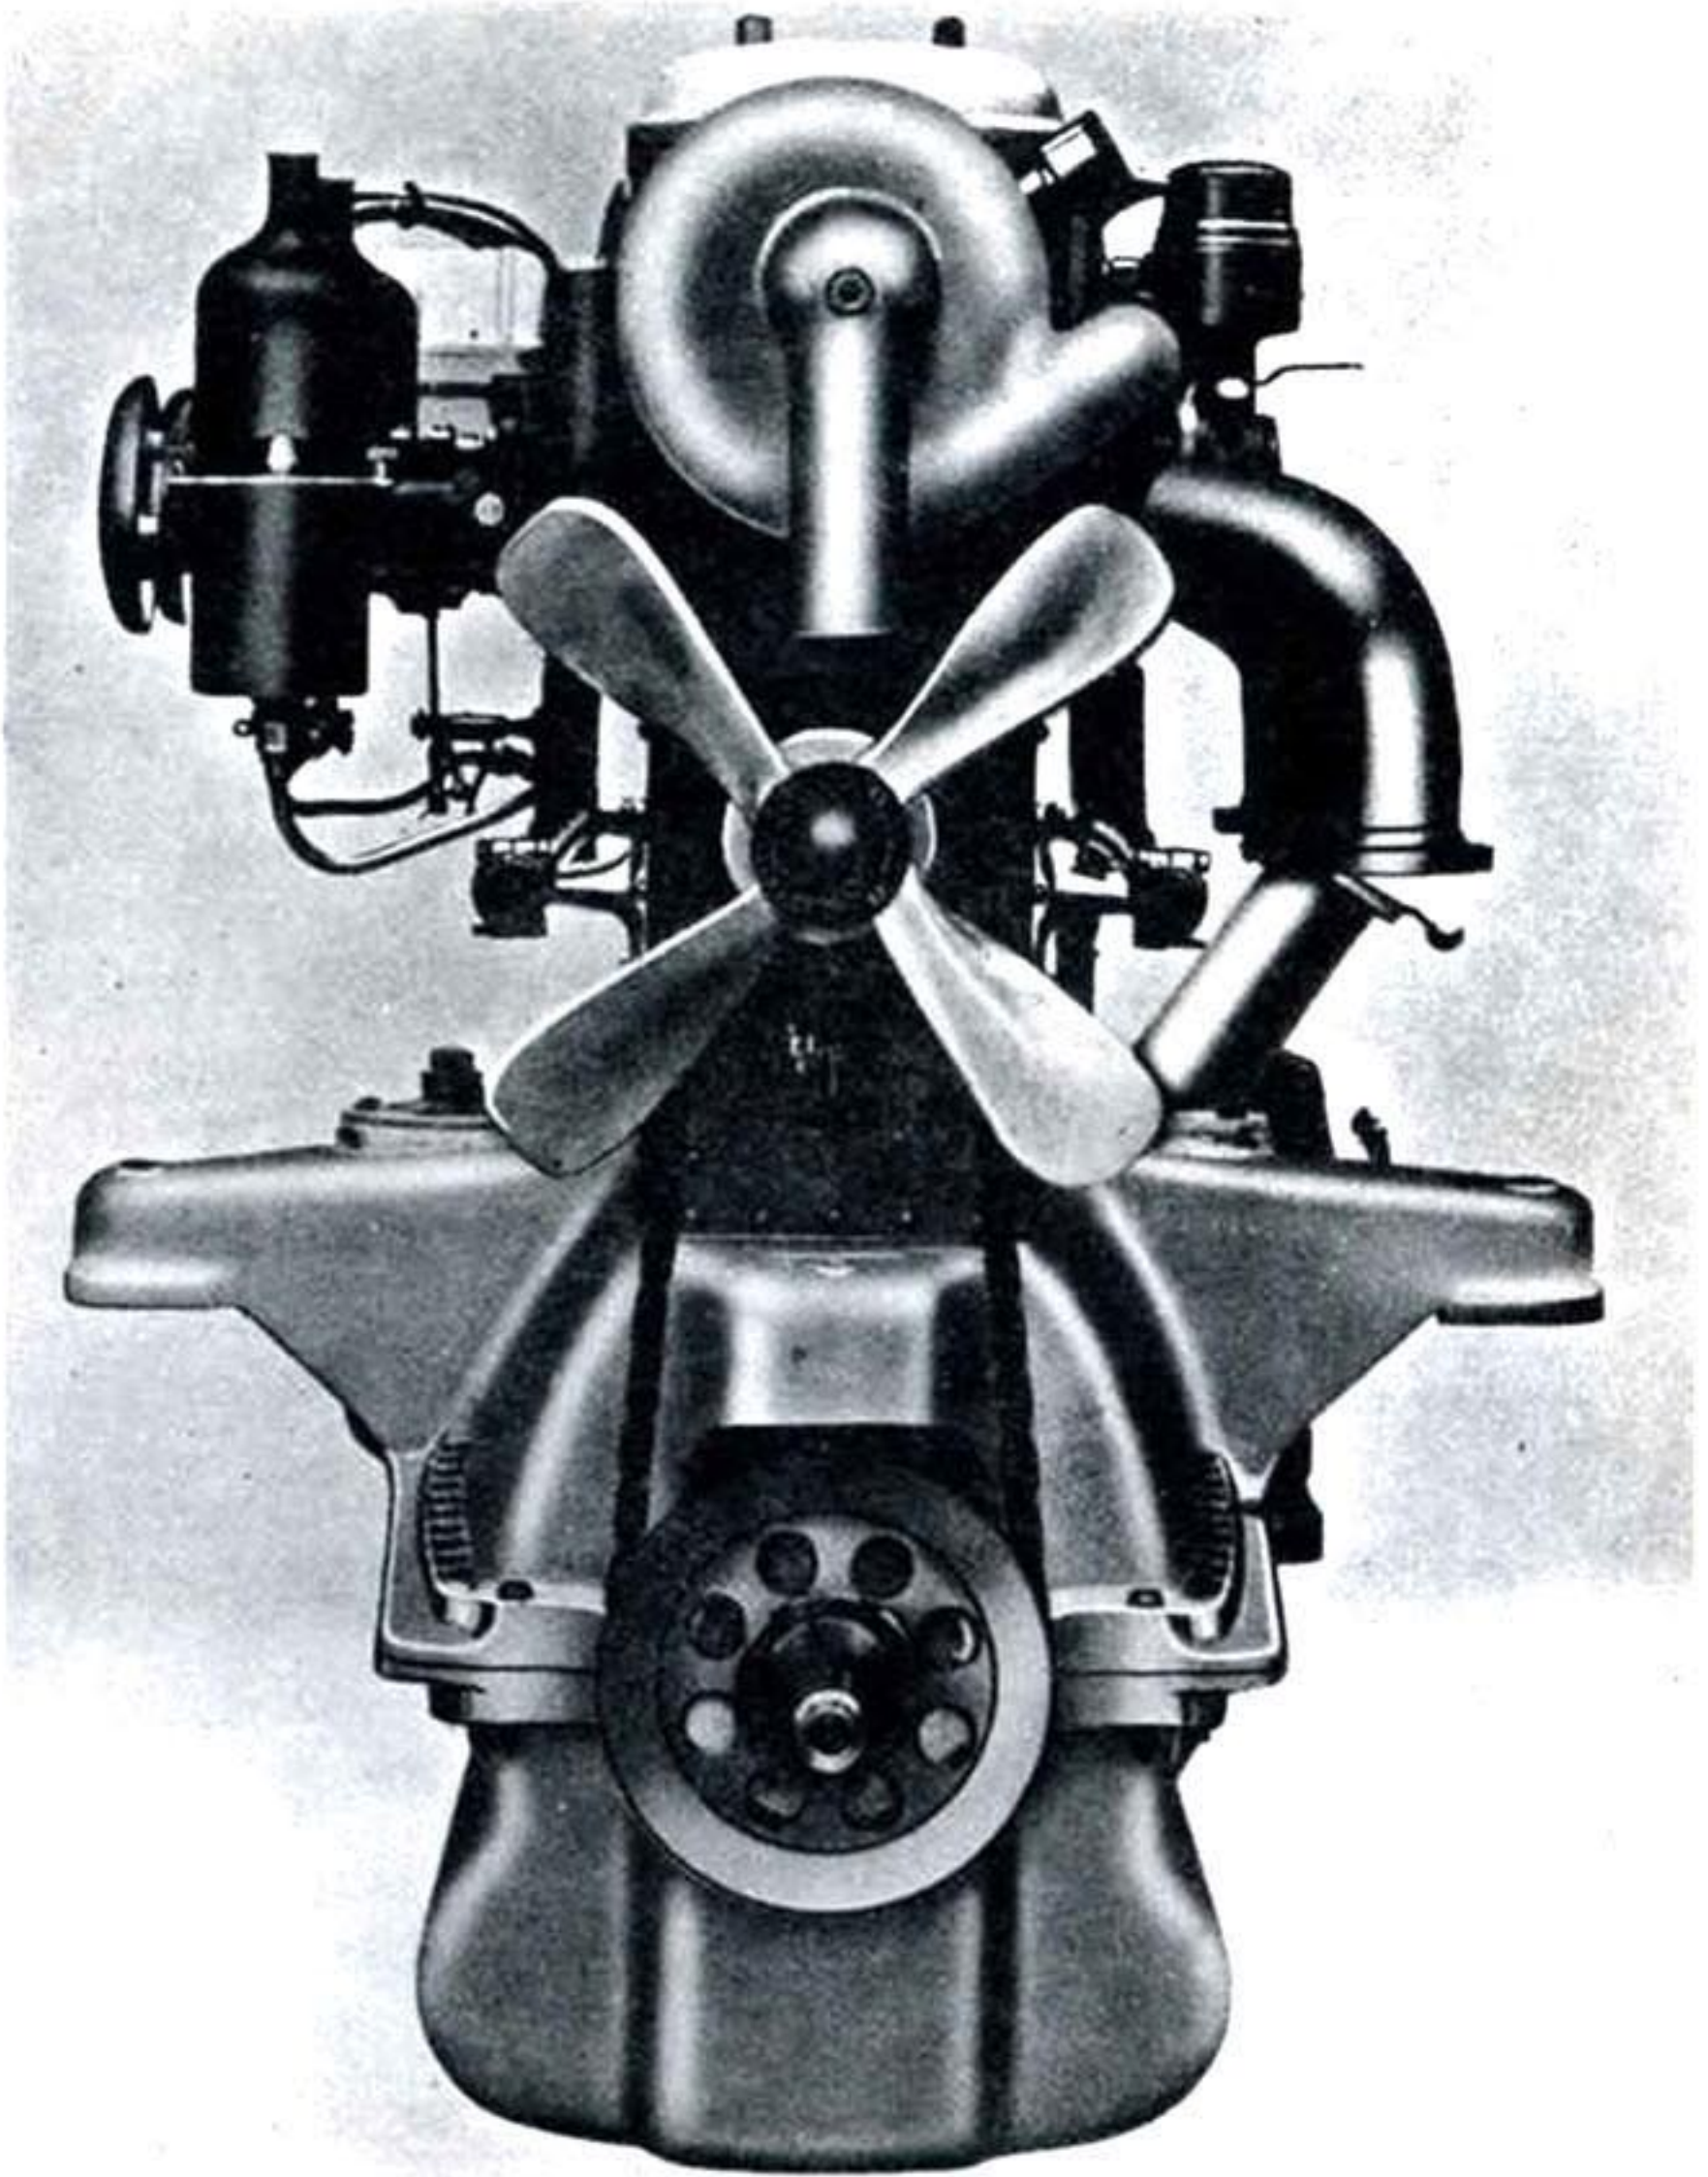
FRONT VIEW OF ENGINE SHOWING FAN AND WATER PUMP.
